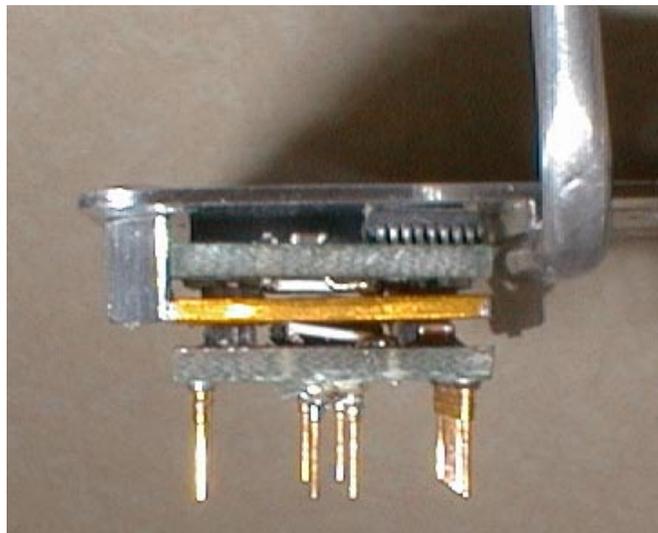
A portion of the cooling mockup, as described in the text. The color of the middle cooling plate is due to a covering of Kapton tape. The full mockup has 21 such stacks.
